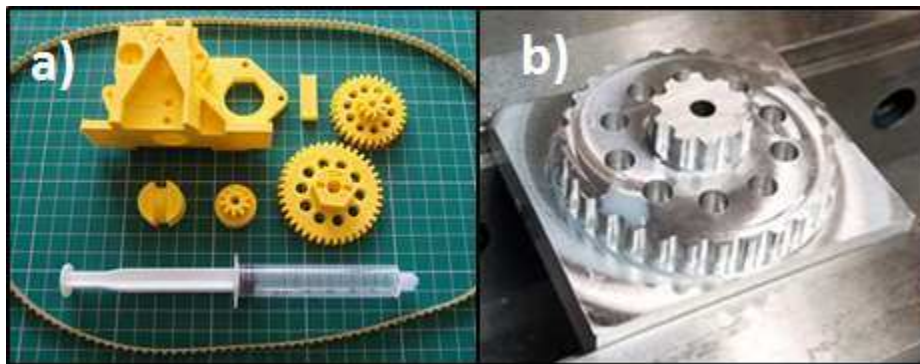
a) Printed syringe pump extruder with plastic gears, b) custom aluminum gears in the process of being machined
